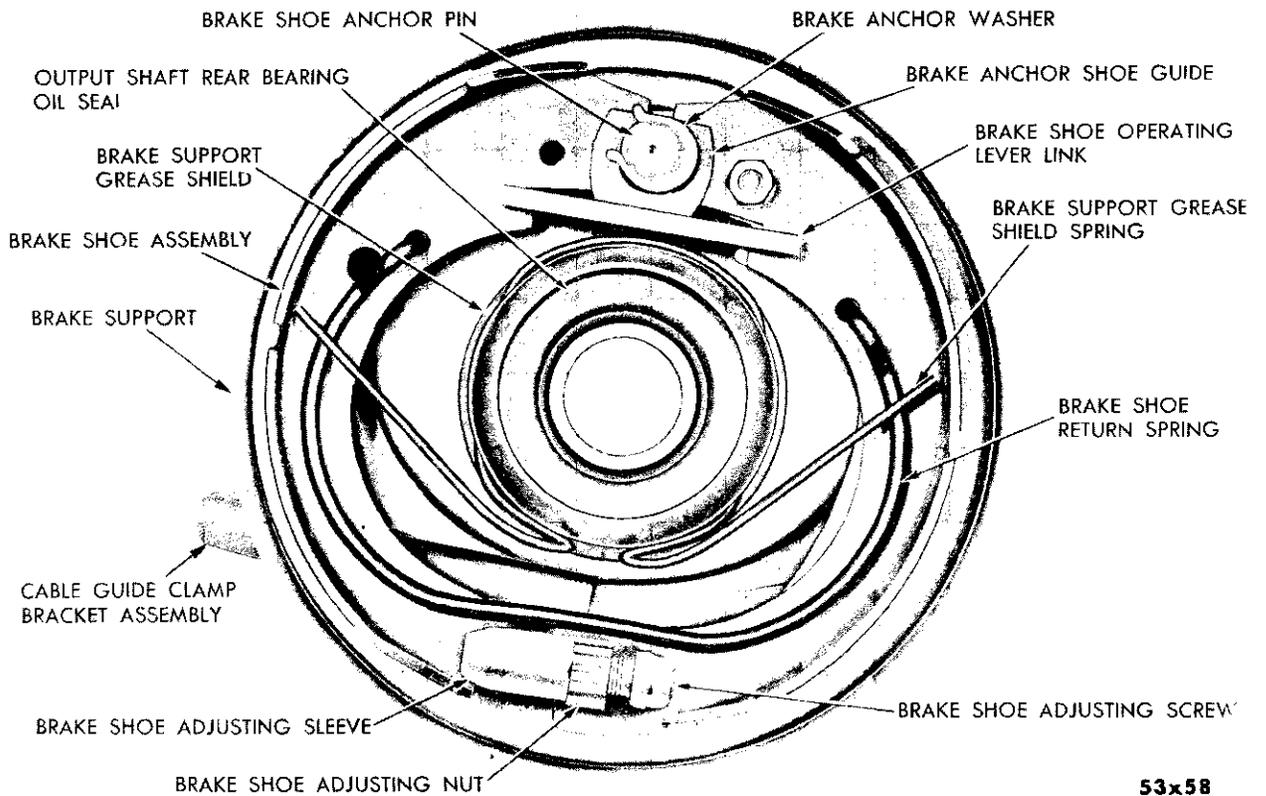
Parking Brake (Internal Expanding Type) (Assembled View)
